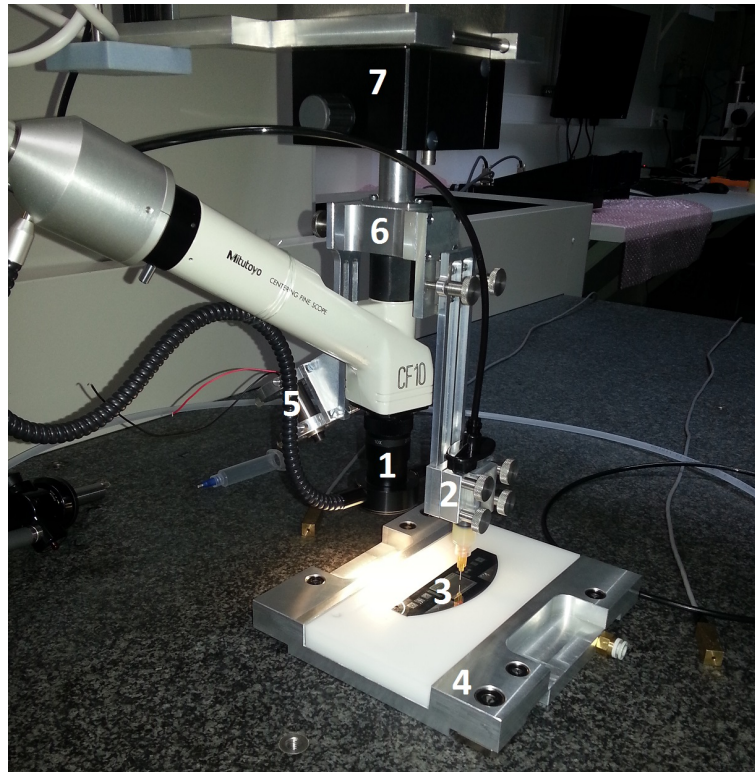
CMM with adjustments for use as a gluing robot. (1) Camera with additional lighting, (2) holder for gluing needle with needle attached, (3) test sample for gluing, (4) gluing jig, (5) Laser for guidance, (6) Mounting head for gluing holder and camera, (7) CMM mounting head
